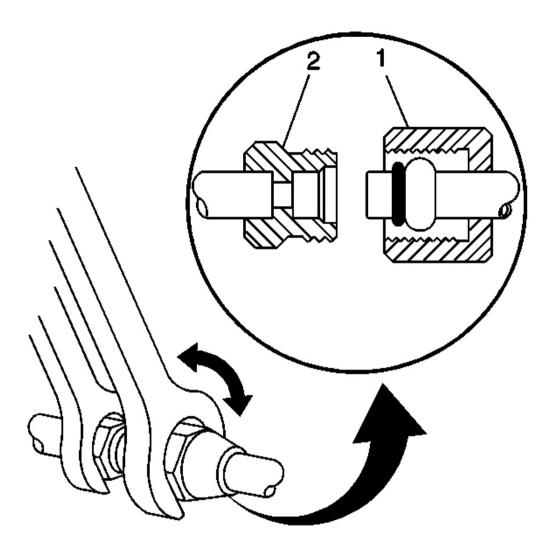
Identifying A/C Line Fittings Courtesy of GENERAL MOTORS CORP.
